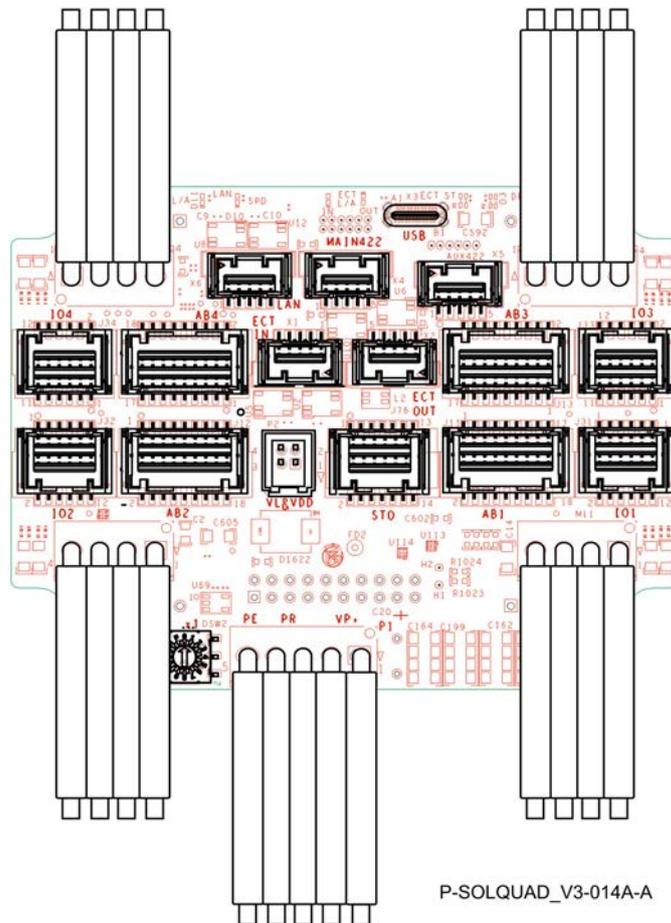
Platinum Solo Quad Board Indicator Labelling (Wired Power Connection)
